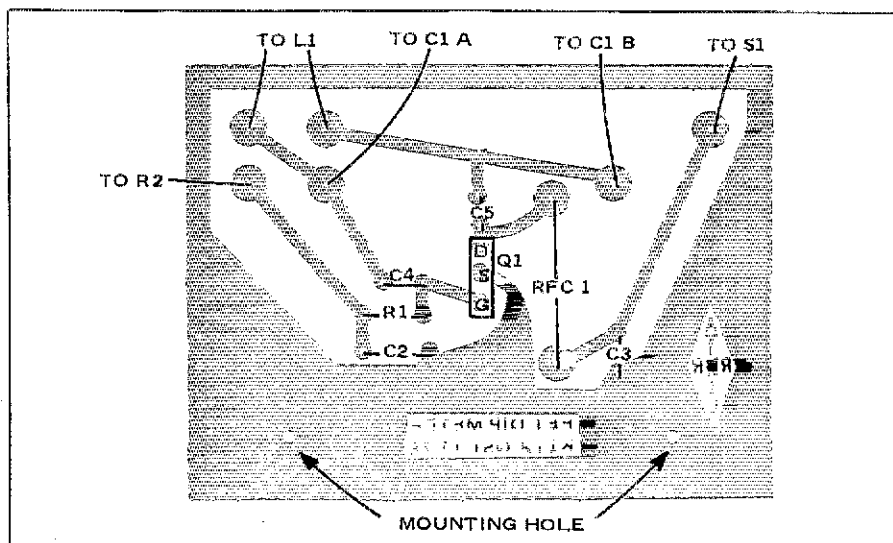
Parts-placement diagram showing where parts should be installed on the pc board. The etching pattern appears in the "Hints and Kinks" section of this issue. The above view is from the nontool or component side of the board.
